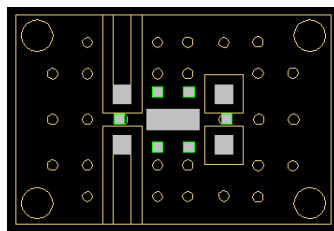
Applying the Solder Paste to the 11 Points on the PCB Surface
